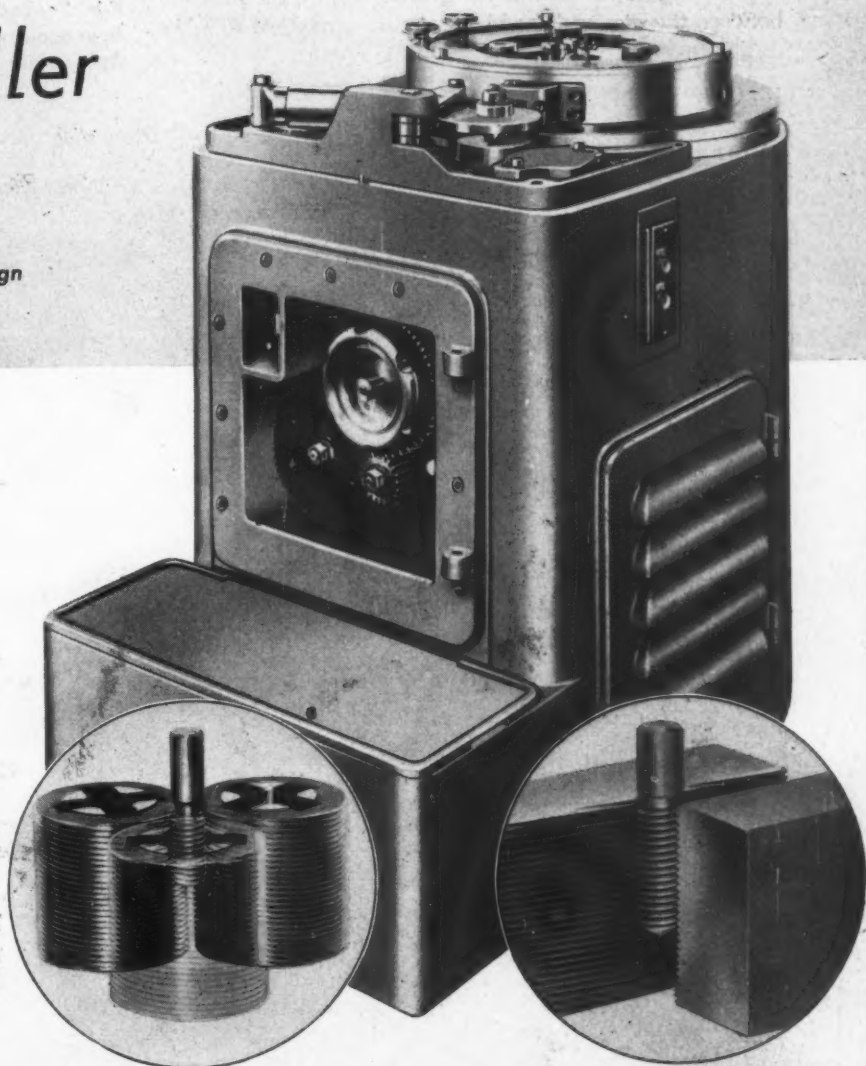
Modern thread roller (covers removed). It employs cylindrical dies positioned as shown in insert at left and can roll threads on parts impractical to handle with flat dies, in manner shown in insert at right
